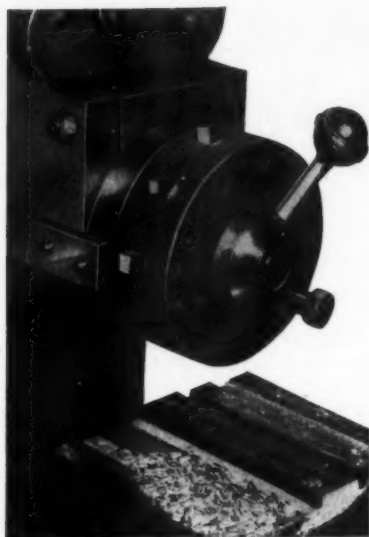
Three tools are shown inserted in the multiple tool holder. More tools can be inserted, if the job requires more than three cutting operations, by simply providing additional tool holes. The tailstock is shown mounted in a fixture.
